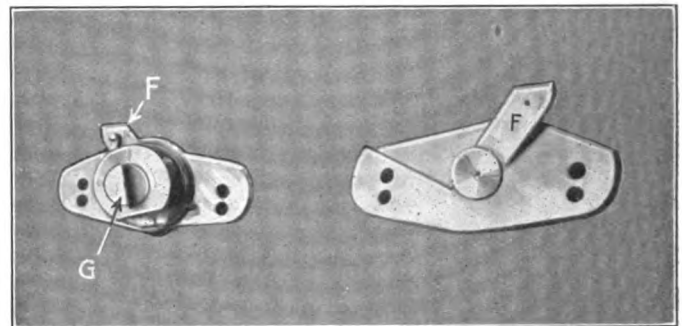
Driving-Dog for Turning Crosshead Wrist Pins.
